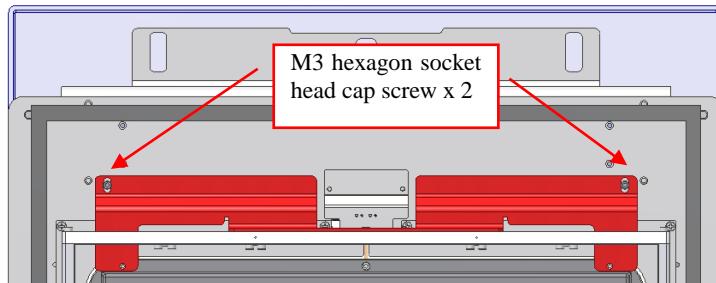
Removal of Door and Mapping Holding Bracket 3
